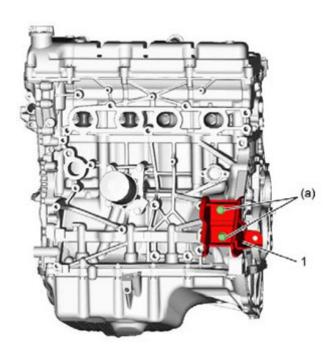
Identifying Engine Front Mounting Bracket Bolt Courtesy of SUZUKI OF AMERICA CORP.
